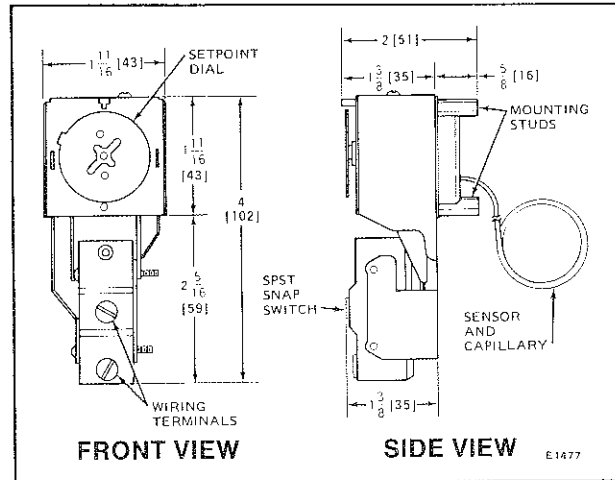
T4031D MOUNTING DIMENSIONS IN in. [mm IN BRACKETS].
